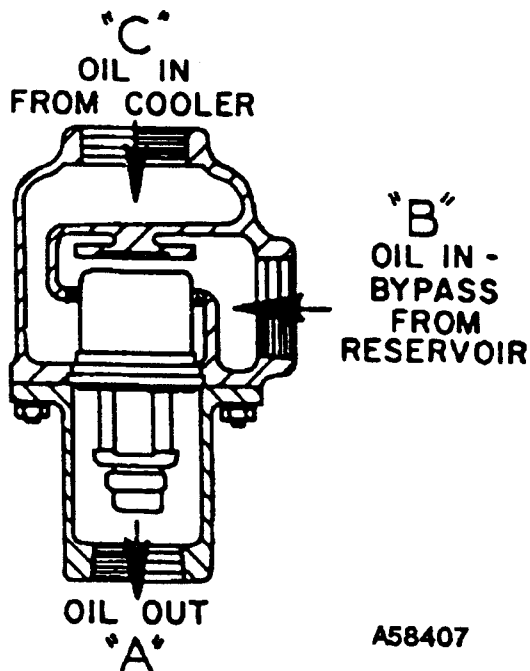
THERMOSTATIC MIXING VALVE
